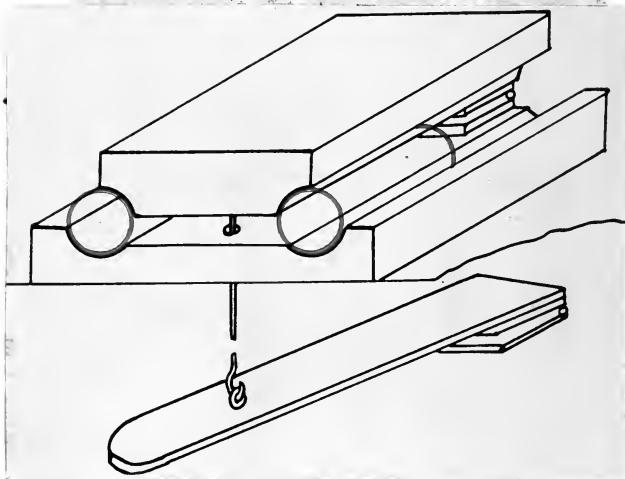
Foot Operated Fixture For Holding Cylindrical Components
